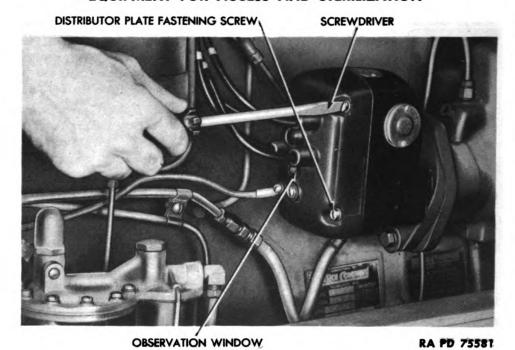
Removing Compressor Unit Engine Magneto Distributor
